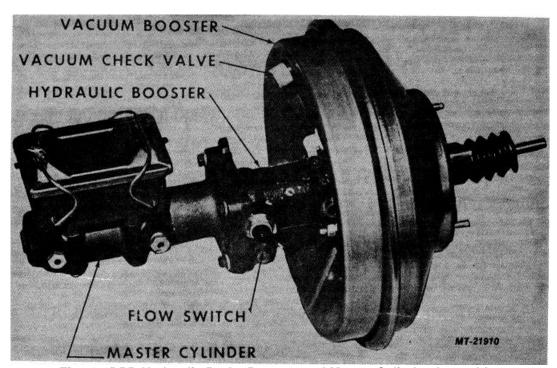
DPB Hydraulic Brake Booster and Master Cylinder Assembly.
